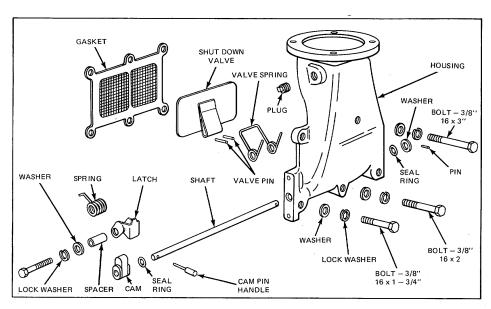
Typical In-Line Engine Air Shutdown Housing Details and Relative Location of Parts
